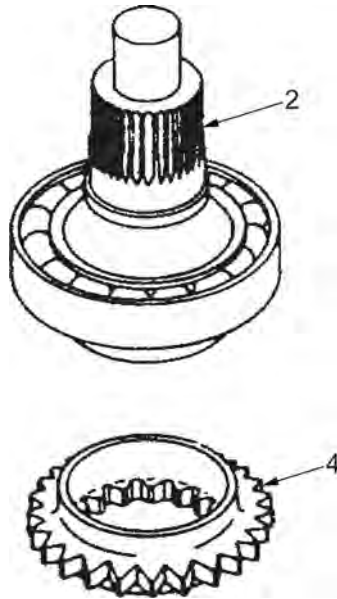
Output Pump Drive Gear and Left Output Shaft Installation.
